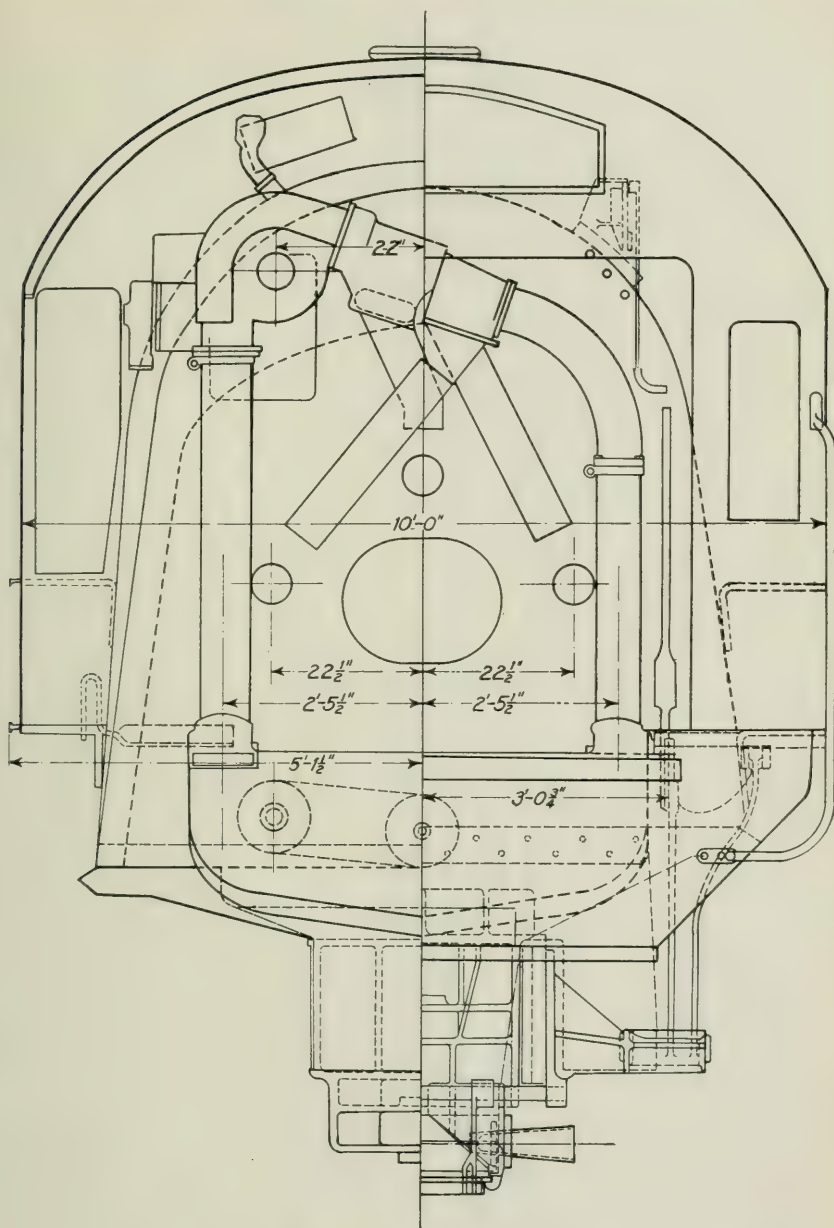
REAR ELEVATION AND SECTION THROUGH THE CAB
